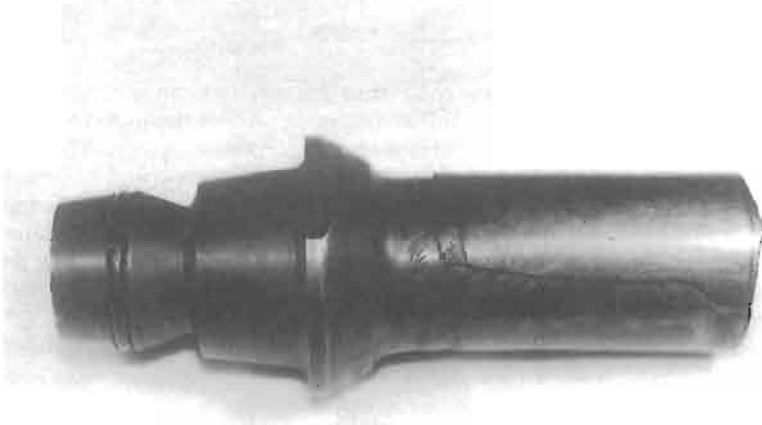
Typical failed actuator piston rod showing the adapter, the circumferential weld and a large crack.
